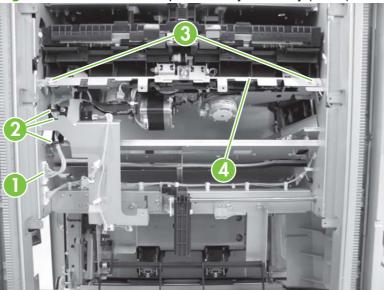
Remove the operation-tray assembly (6 of 6)
